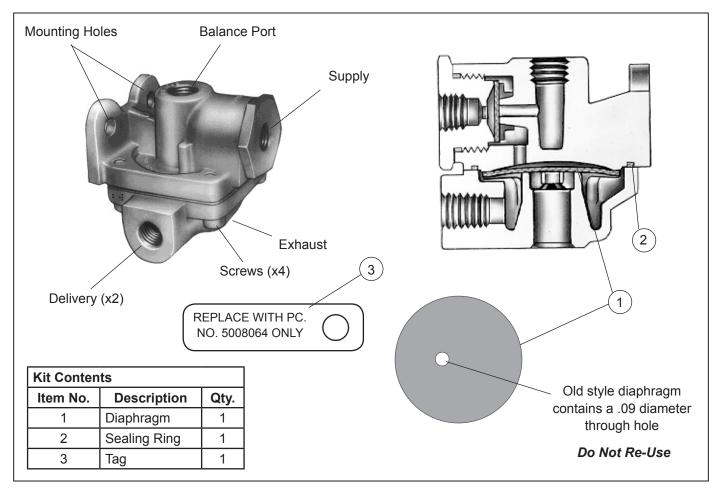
Bendix® QR-1C® Exterior and Sectional Views
